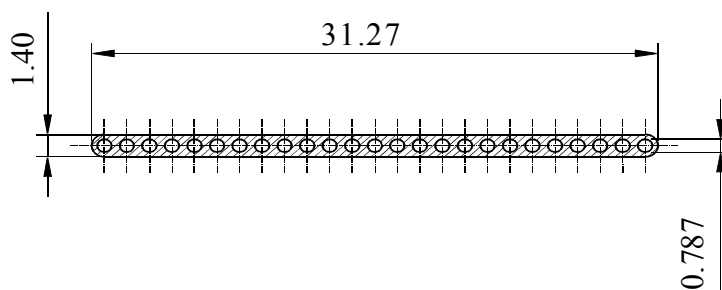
Cross-section of the multiport extruded (MPE) tube (Dimensions in mm)
